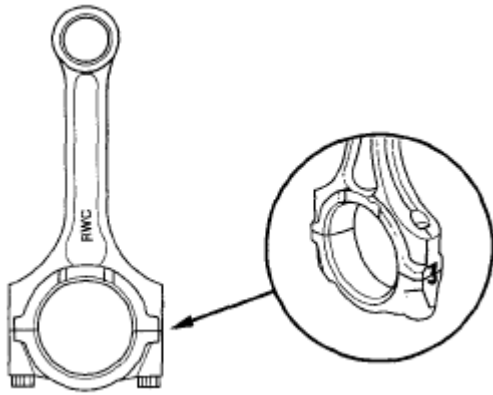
Identifying Connecting Rod Big End Bore Code Location
